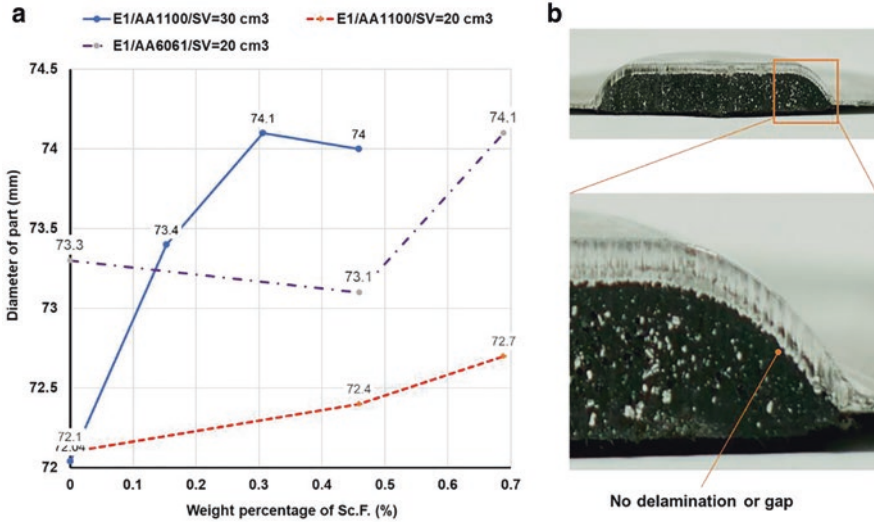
(a) Diameter of the injected samples. (b) Cut section view of a hybrid sample produced by SCPIF
